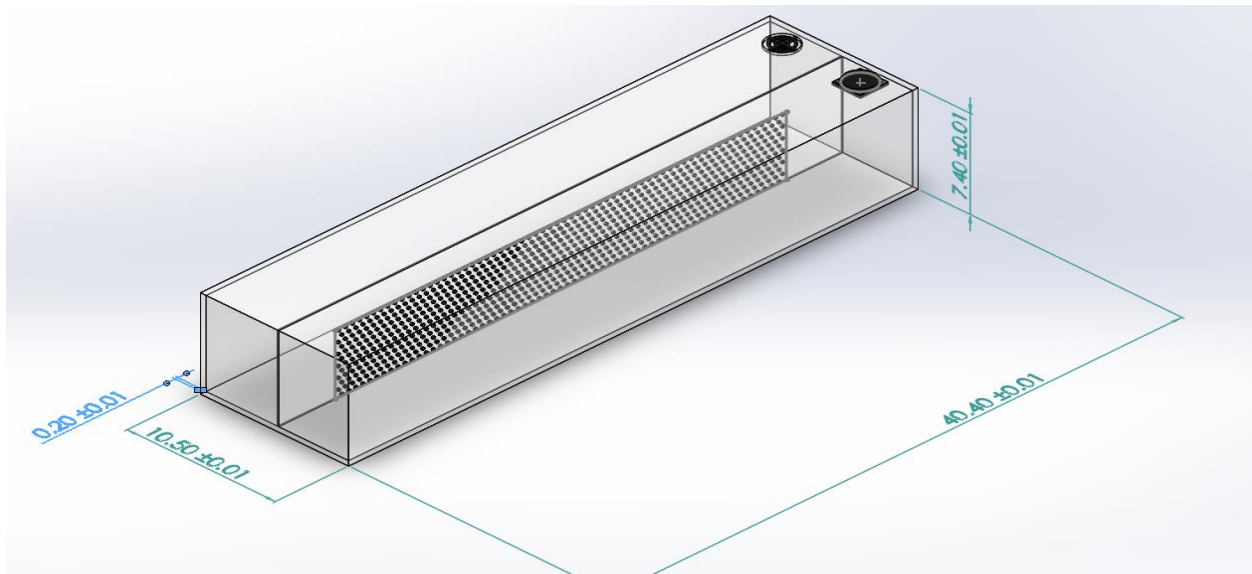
CAD of Design 1 with dimensions with a single 32cm porous membrane
